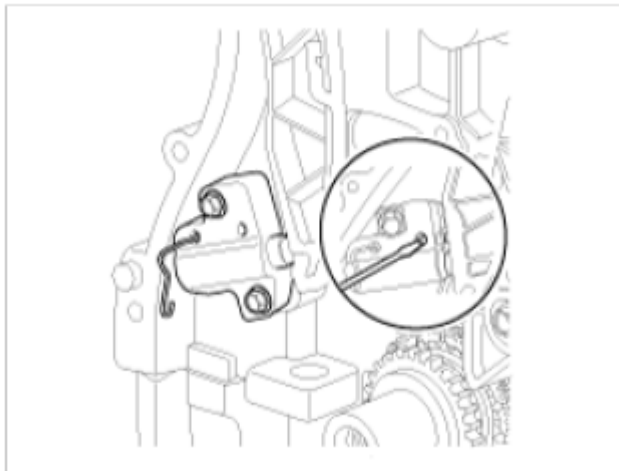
Identifying Oil Pump Chain Tensioner Assembly
